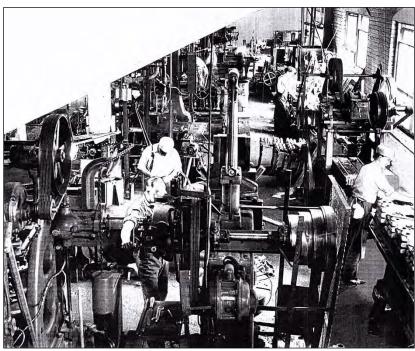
Overview in factory building, first floor, east sidewall, looking north, ca. 1944 (Courtesy of James M. Rocklin)
